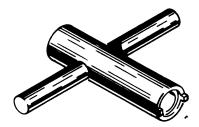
INDICATOR SWITCH LIGHT REMOVAL TOOL
